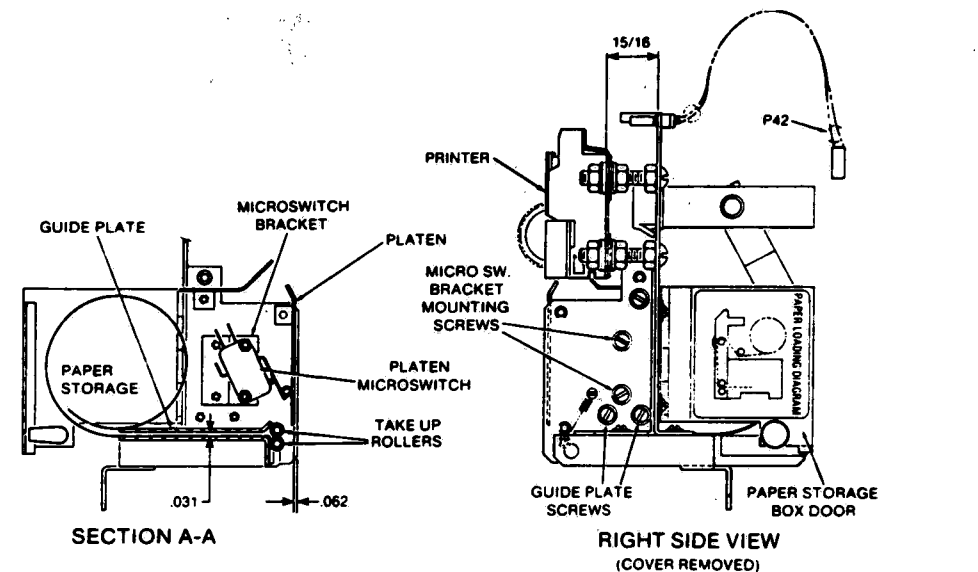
PRINTCON PRINTER ASSEMBLY (Units Before 6/85).
